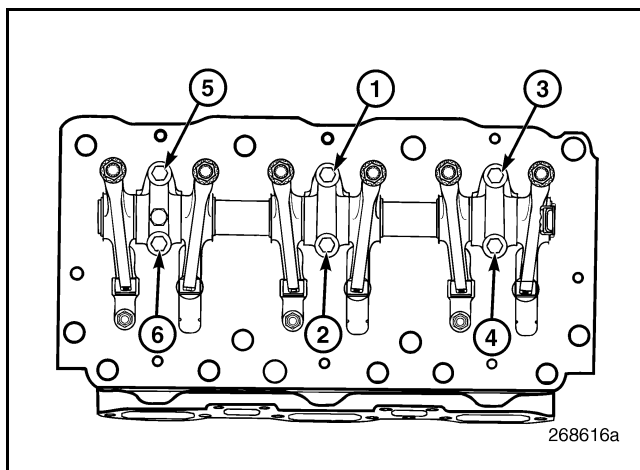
Rocker Shaft Assembly Capscrew Tightening Sequence
